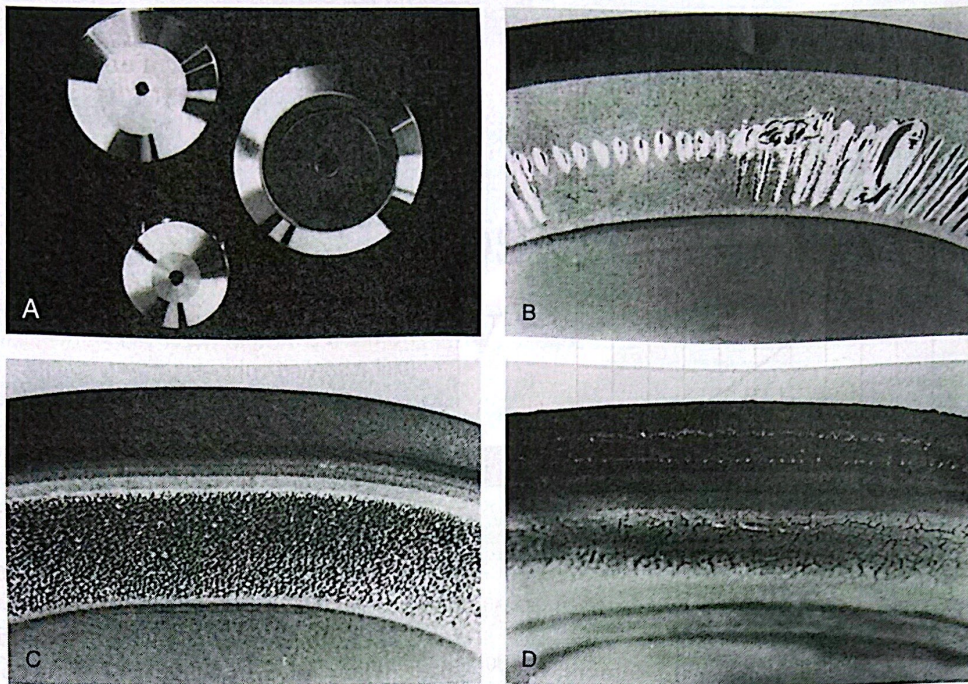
Comparison of smooth, shiny appearance of rotating anodes when new (A) and their appearance after failure (B through D). Examples of anode separation and surface melting shown were caused by slow rotation due to bearing damage (B), repeated overload (C), and exceeding of maximum heat storage capacity (D).
